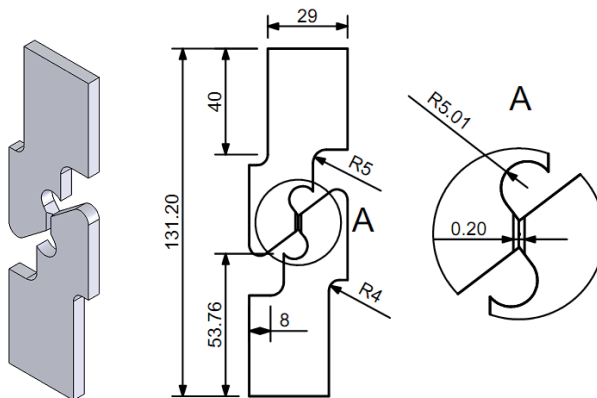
Geometry of pure-shear specimen for a universal tensile test machine.
